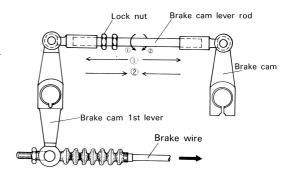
Adjusting front brake cam lever connecting rod
